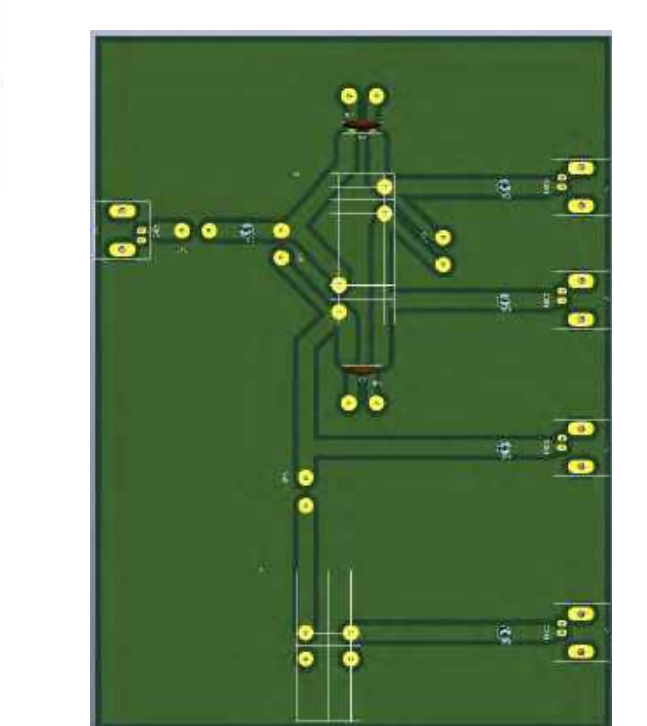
3D rendering of PCB implementing a test board (top view)
